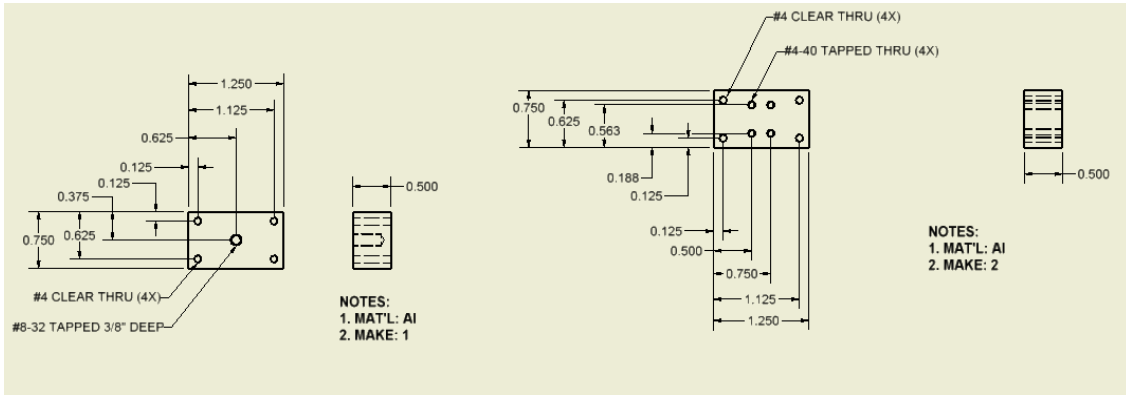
Drawing for mounts that interface between the 561-UM mini-rail carriages and other components such as pinhole and sample mounts.
